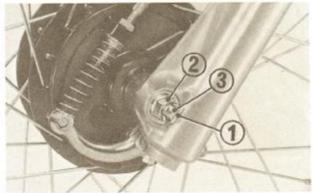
(1) Cotter pin (3) Front axle (2) Axle nut
